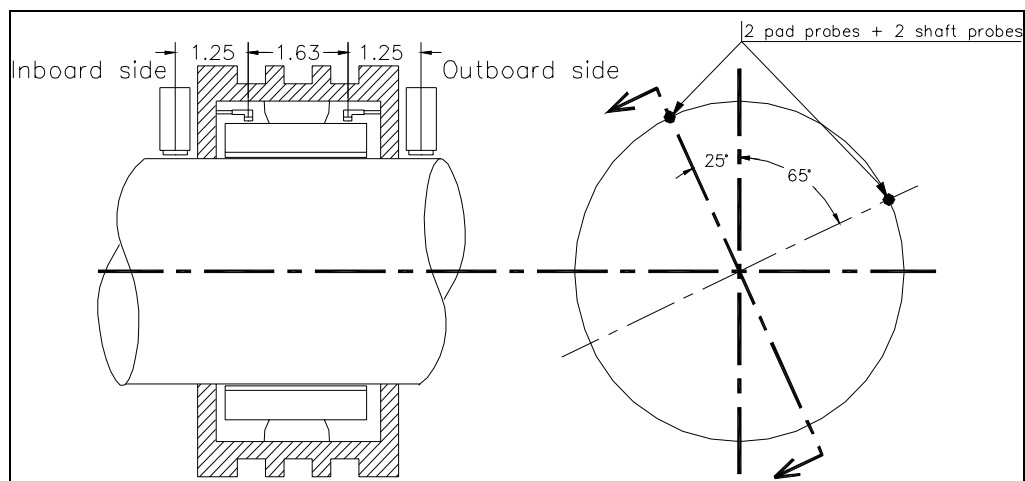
Arrangement of shaft and pad probes in the bearing
